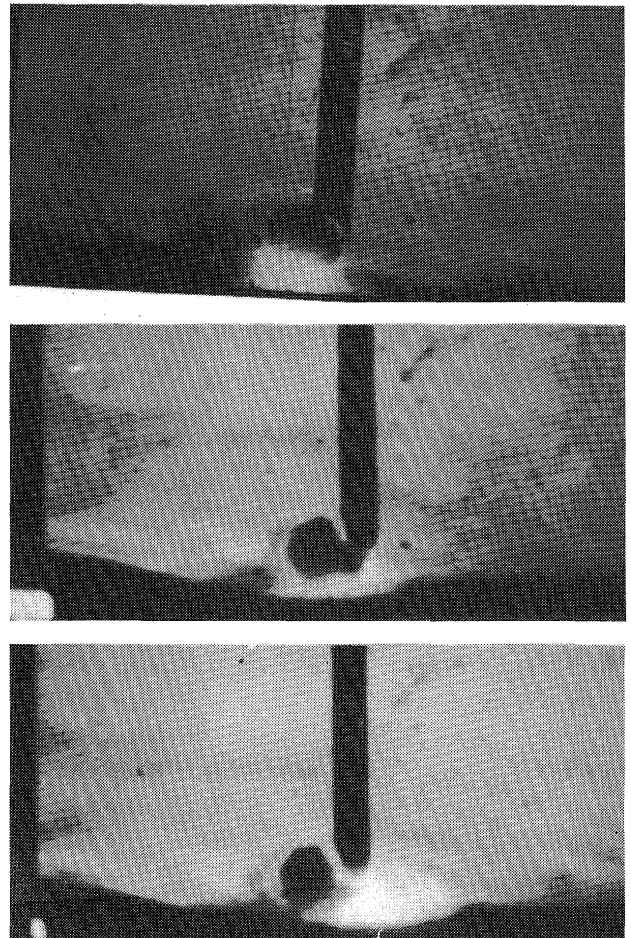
Typical photographs showing the drop transfer in flux cored arc welding using wire A under DCEP condition.
